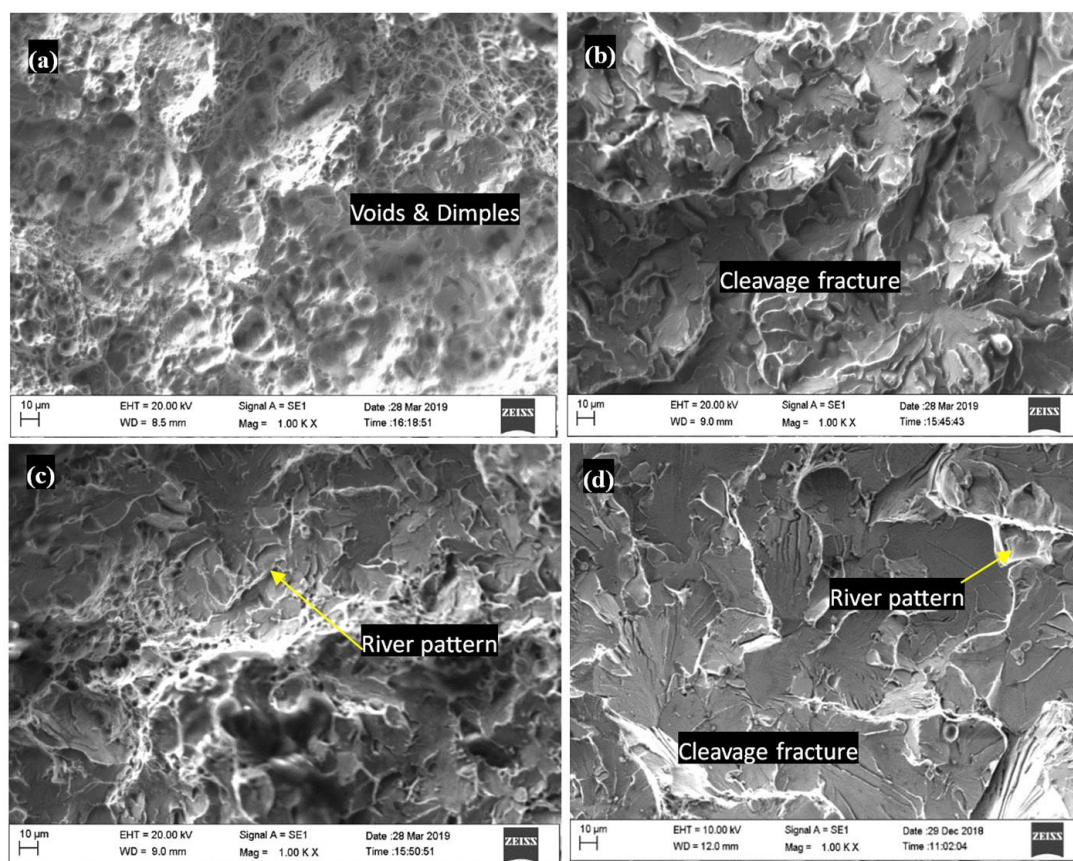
SEM fractographs of EN 353 (a) carburized core (b) carburized case (c) post carburized core (d) post carburized case.
